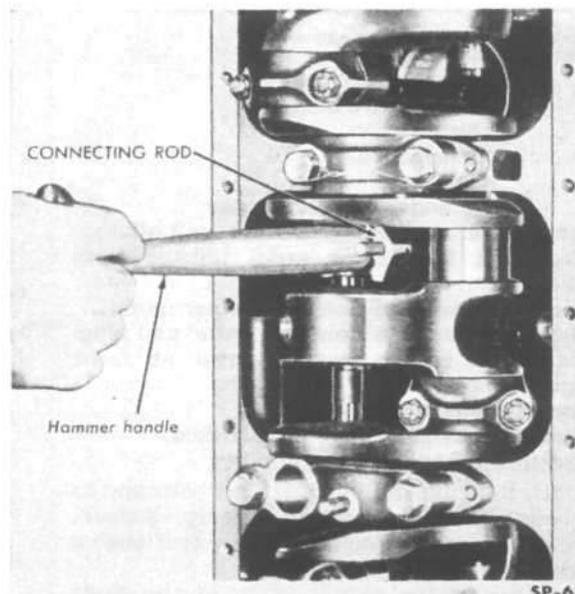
REMOVING PISTON AND CONNECTING ROD ASSEMBLY
